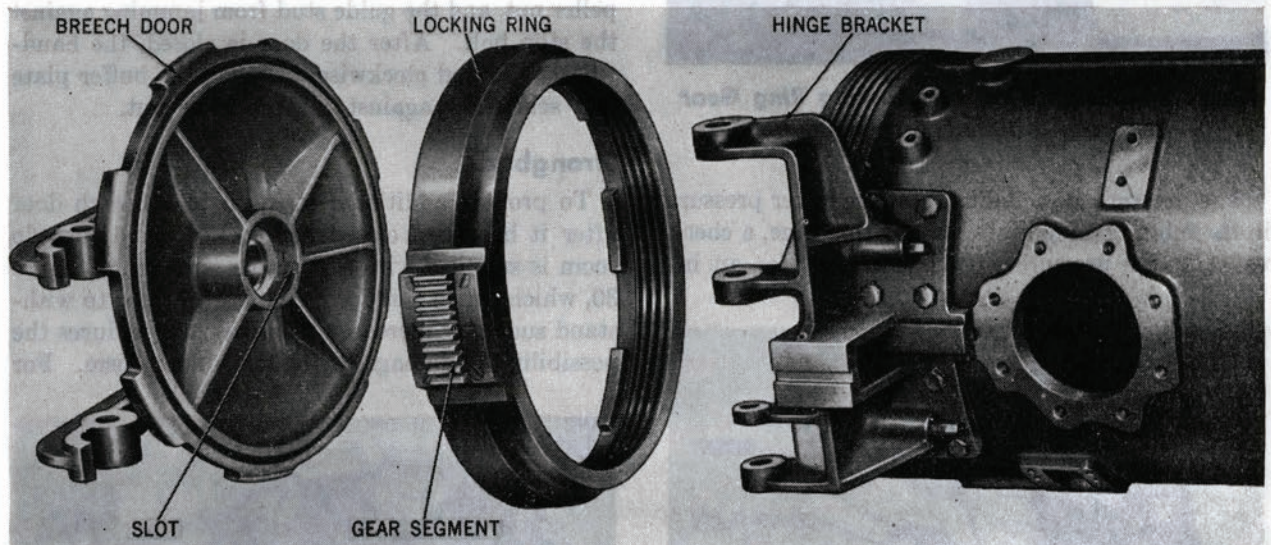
Breech End of Right-Hand Tube, Breech Door Open.
